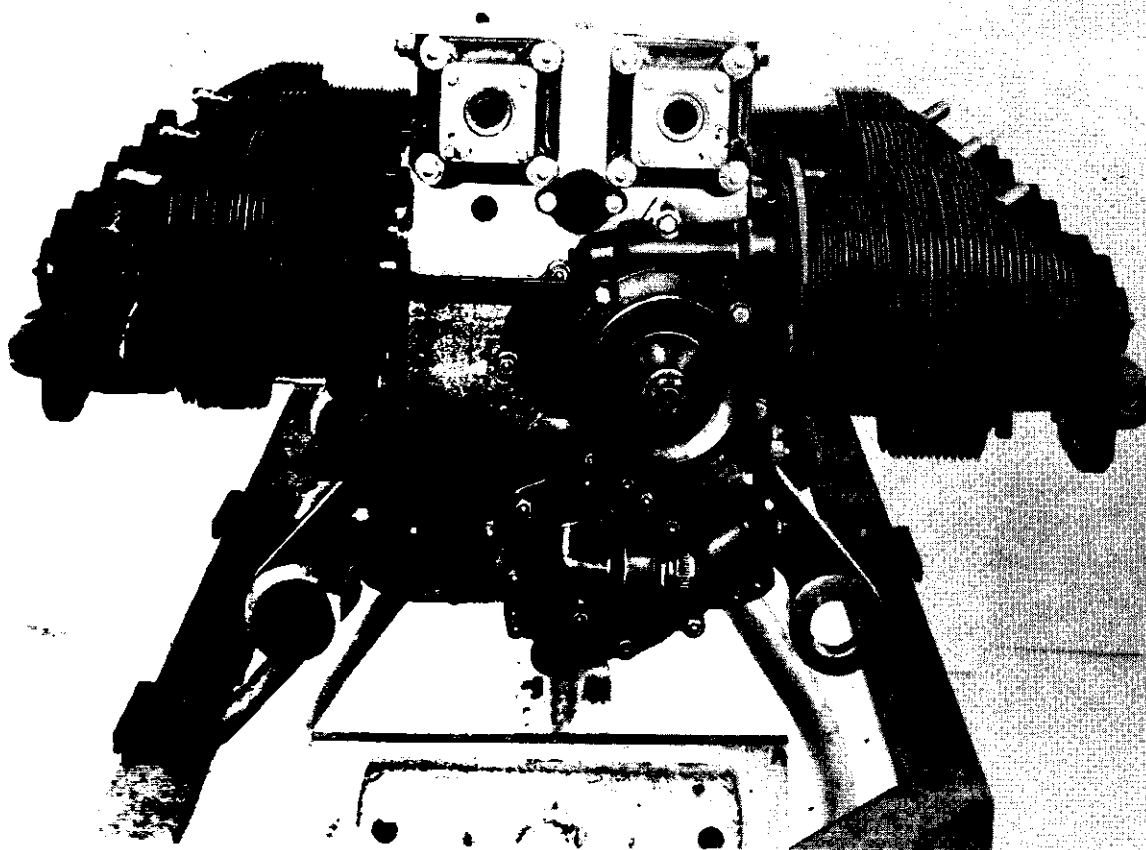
Crankcase with Cylinders, Oil Pump, Starter Adapter and Accessory Adapters Installed on O-470-A
